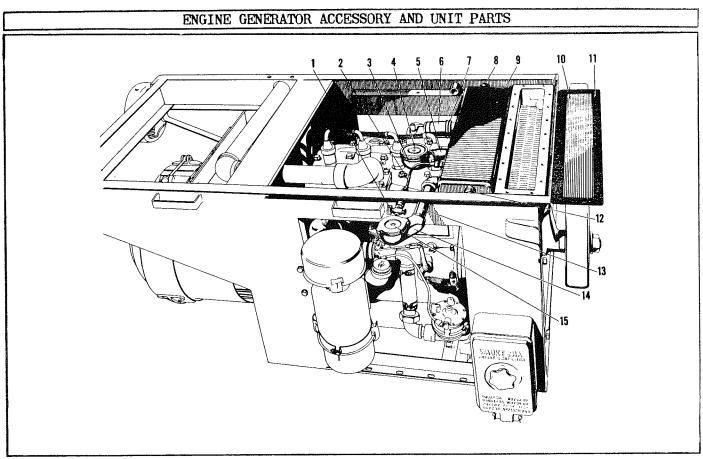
RADIATOR DETAILS OF MODEL "B-1" ENGINE-GENERATOR
